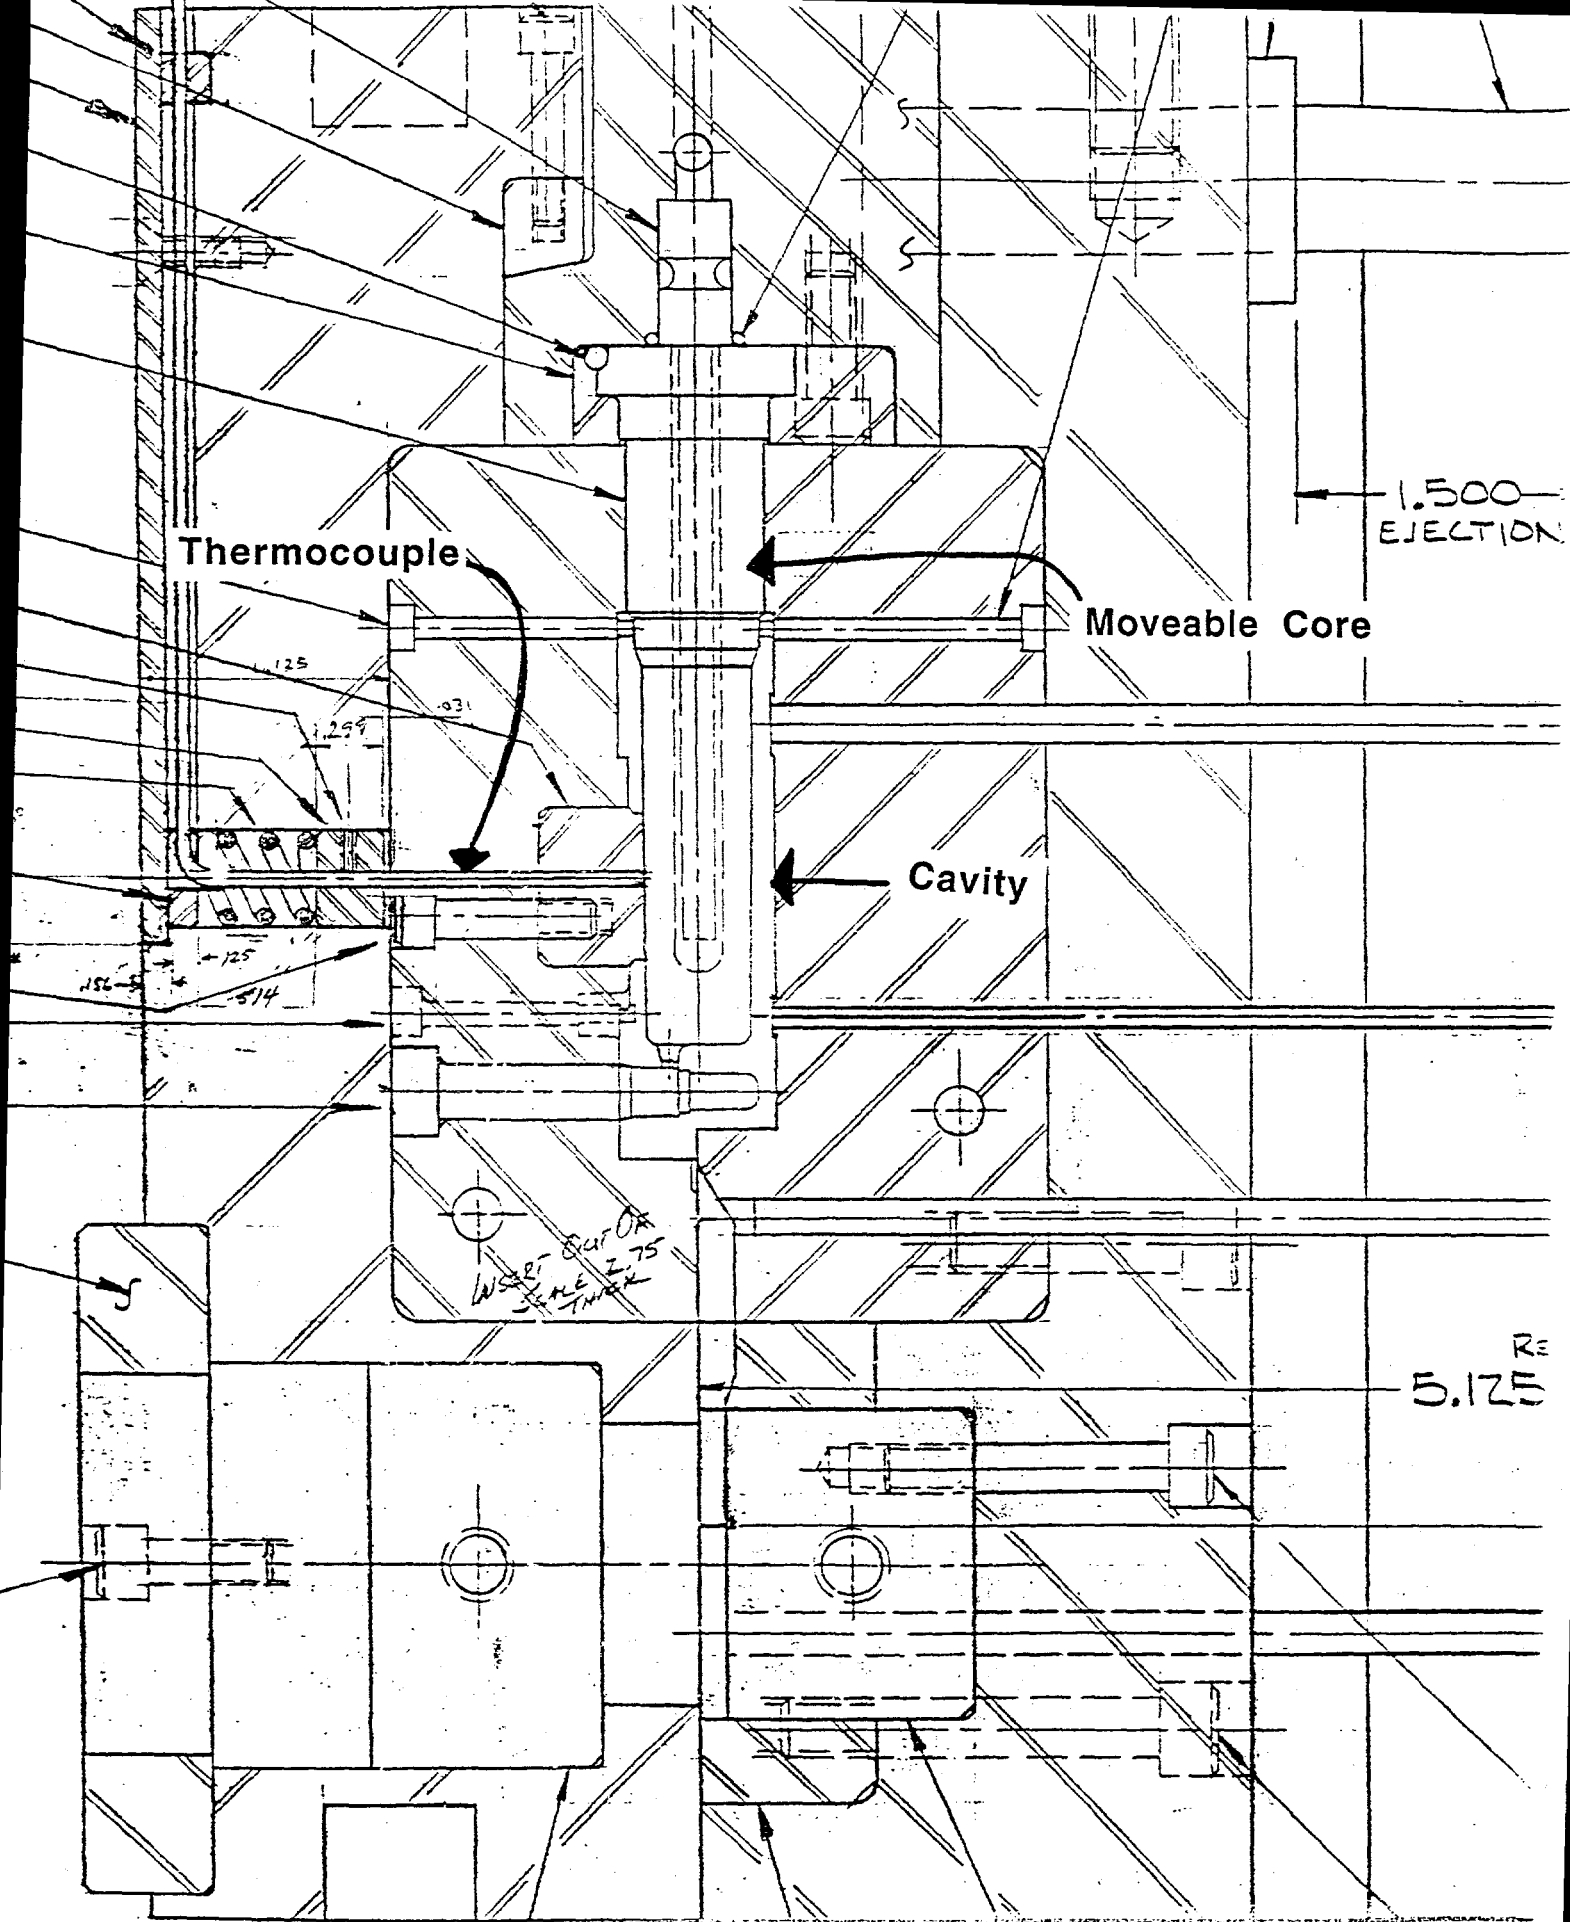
Die drawing across parting line, COMPANY "C" casting.
